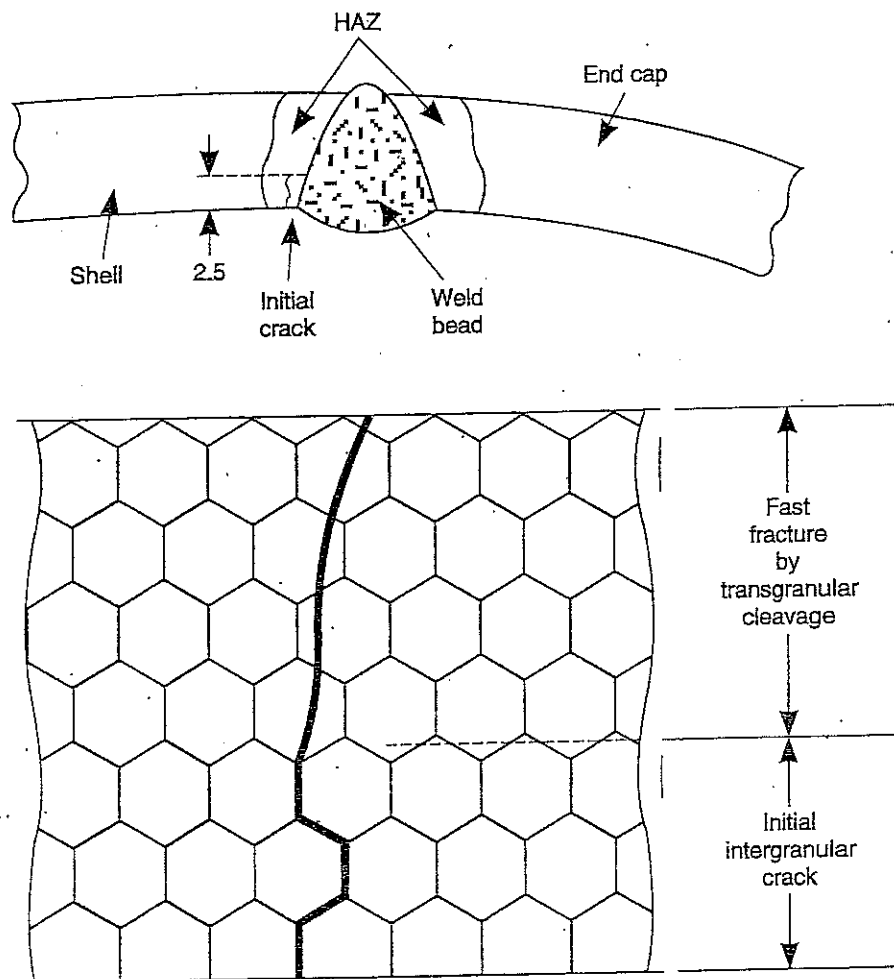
The geometry of the failure. Dimensions in mm.
